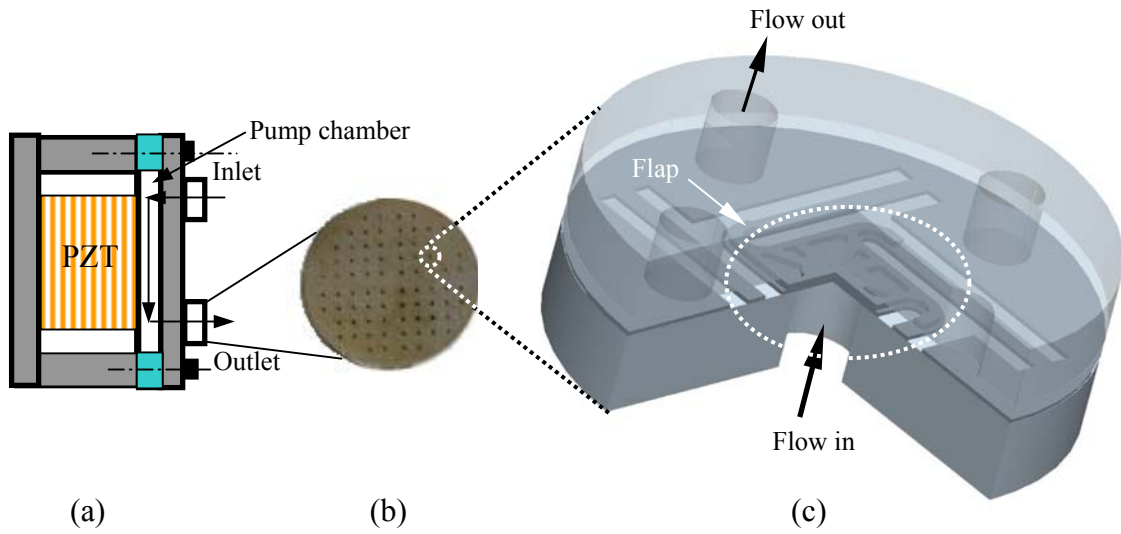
Robust pump and valve. (a) pump (b) valve array (c) concept sketch of the valve
